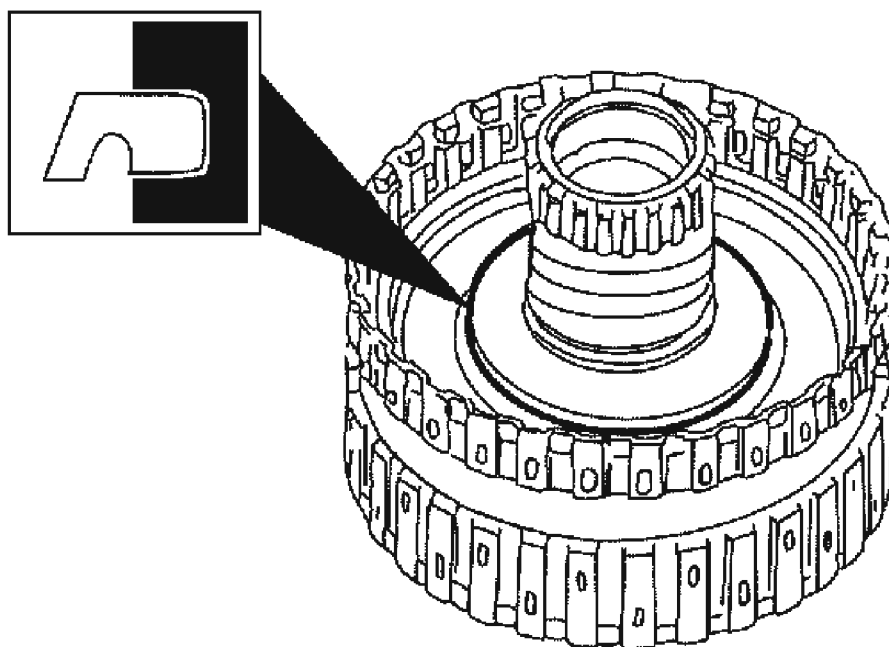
Installing Forward Clutch Pressure Plate Retaining Ring
